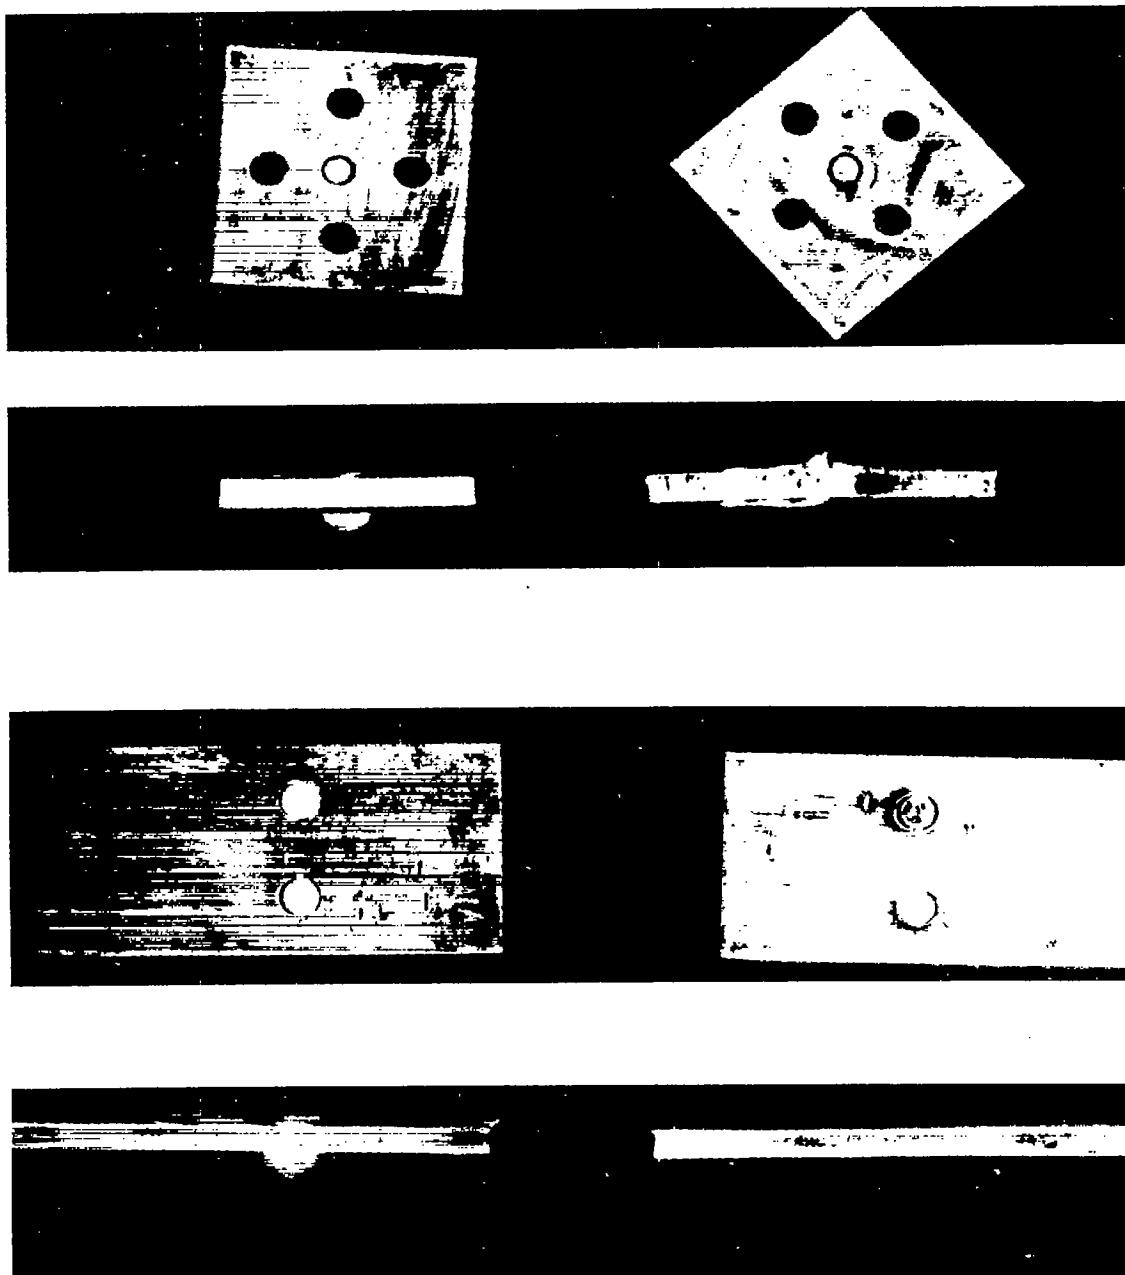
Type 3 failure; rivet fails in shank.
